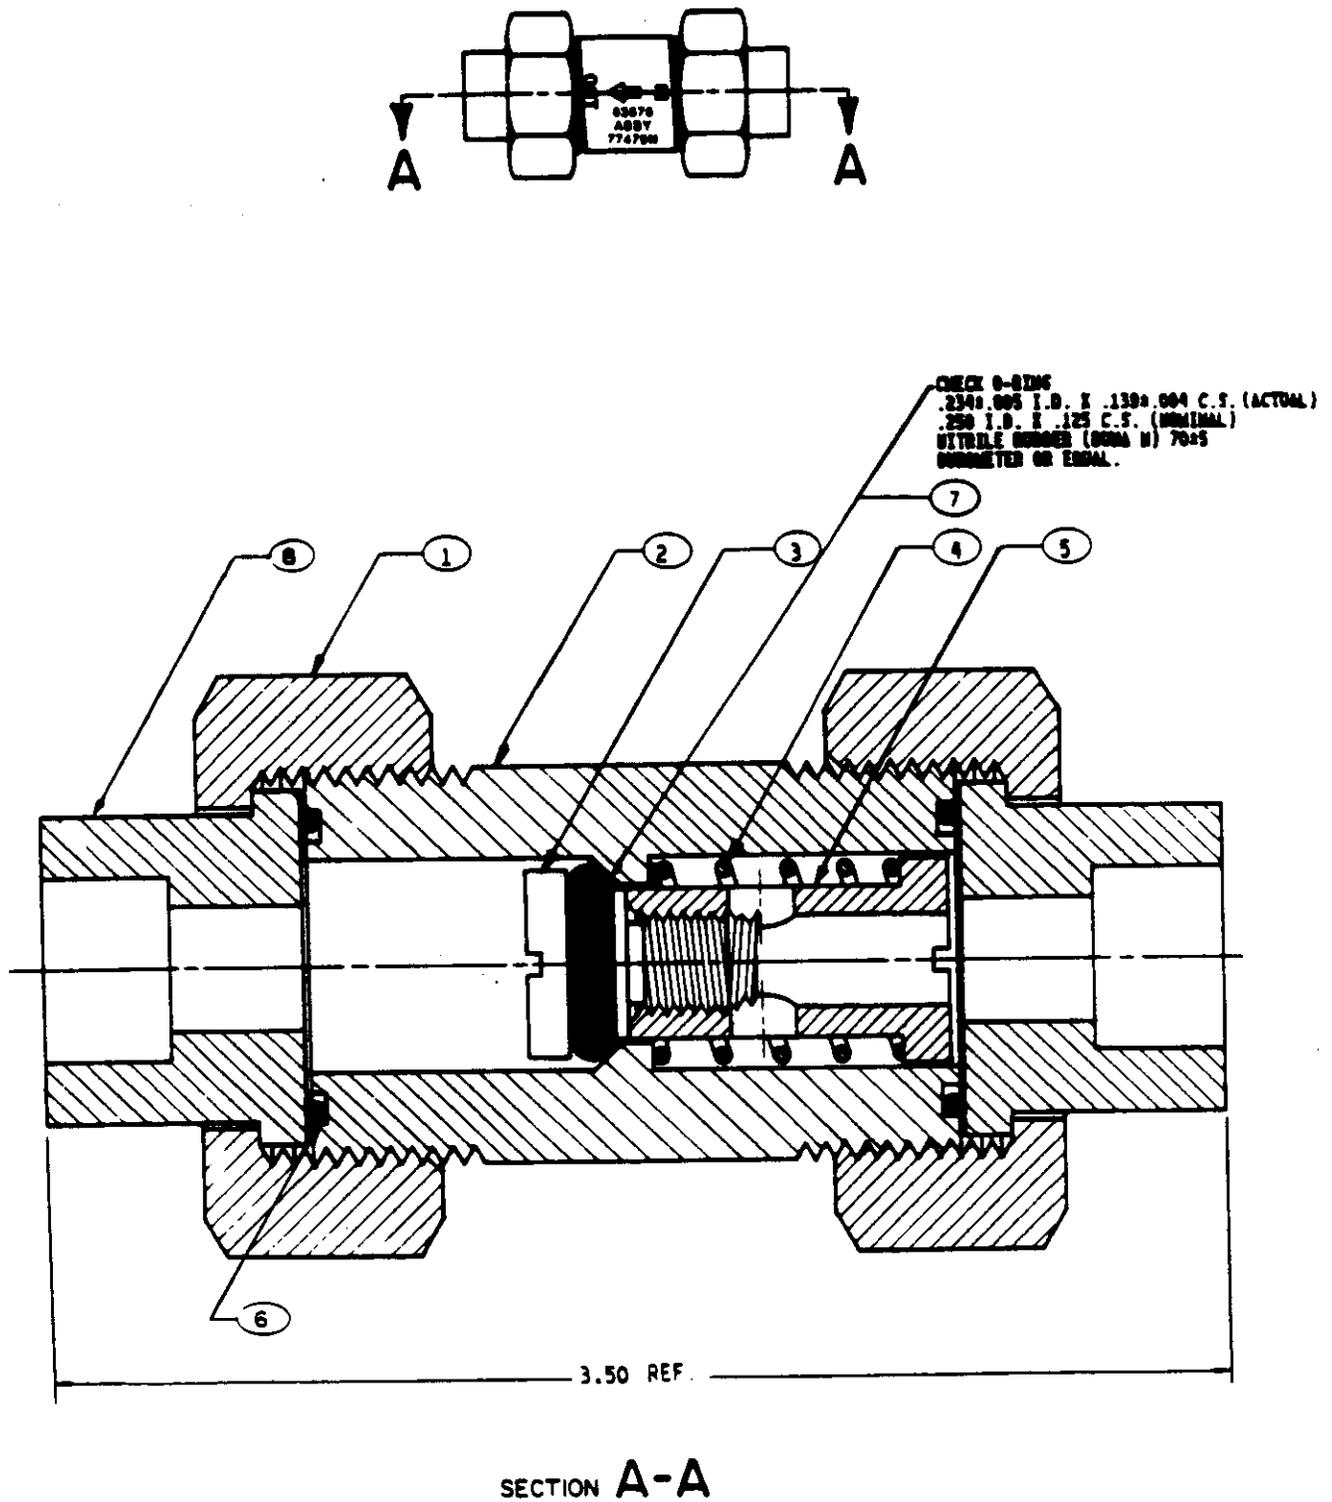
Valve Assembly, Check 0.25 in., Stainless Steel Ends
